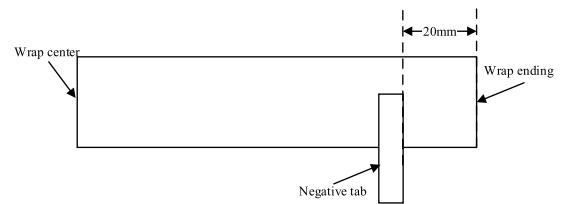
Cylindrical Li-ion battery negative tab without spot welding [21].
